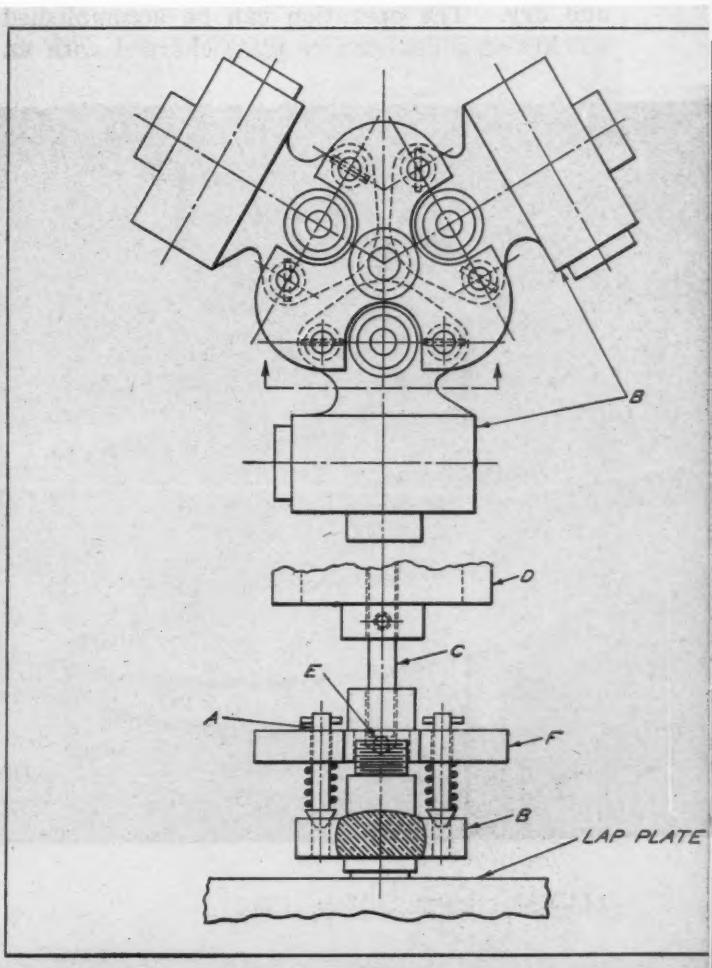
Three air-valve bodies are held in the special fixture illustrated while lapping a small-diameter face on each.
